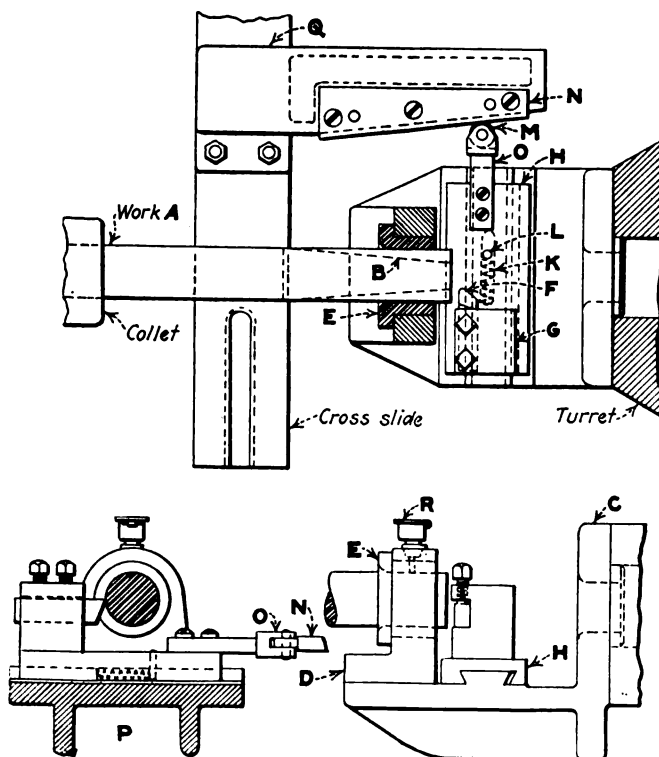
TAPER GENERATING TOOL WITH SUPPORT FOR WORK
